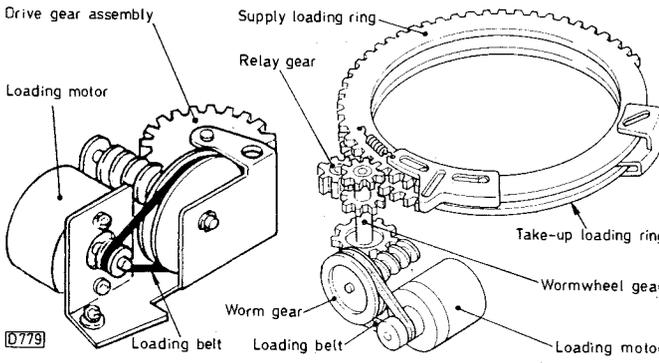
The loading block and loading rings. The simplest way to replace the belt is to remove the block, but note that the rings are then free to move and can thus become unmeshed.
